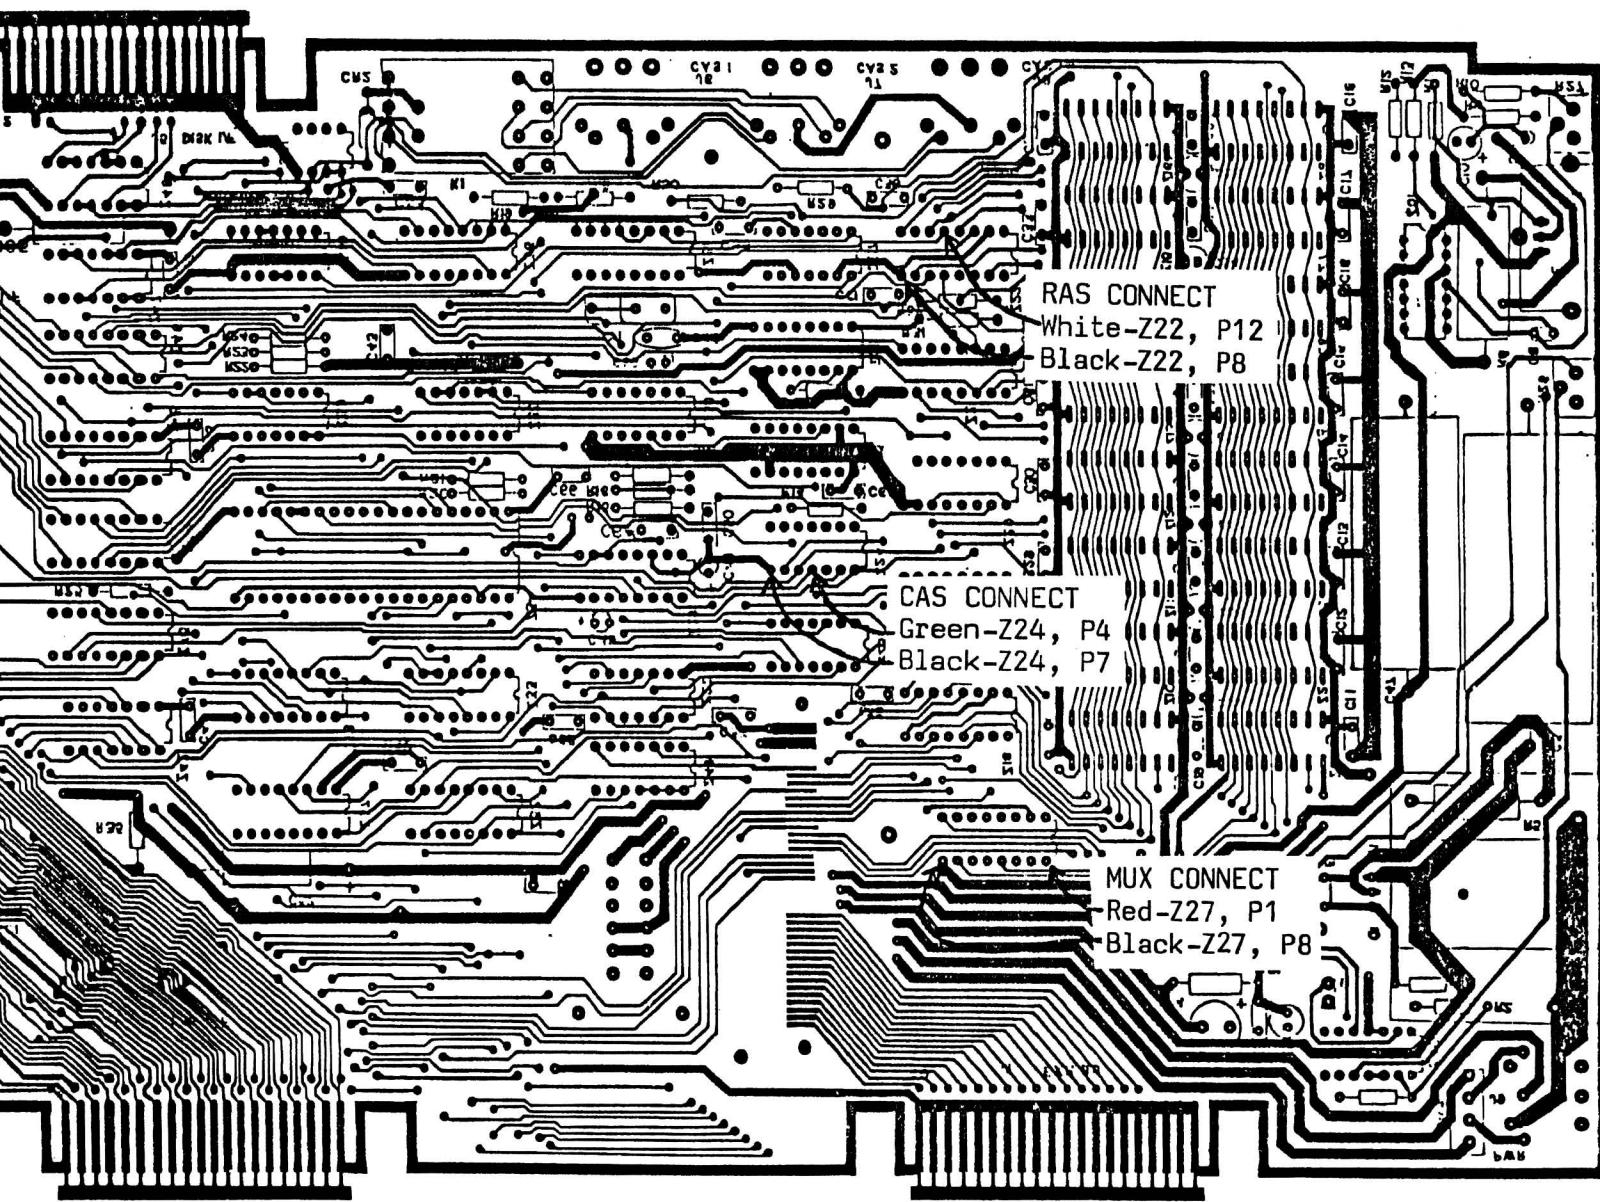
EXPANSION INTERFACE P.C. BOARD (BOTTOM VIEW)
